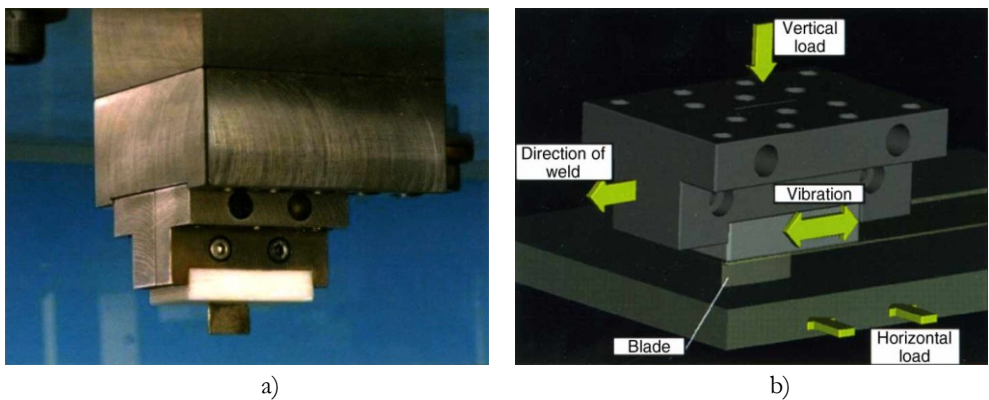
Viblade welding process invented by TWI. a) Viblade machine b) Description of Viblade process. [29].
